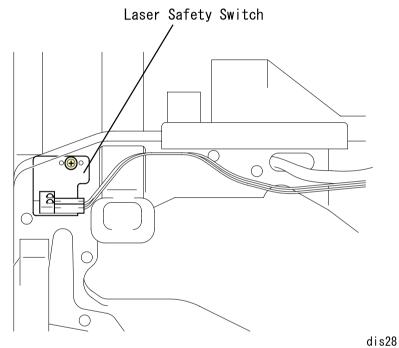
Laser Safety Switch (CDRH-SW) Removal
